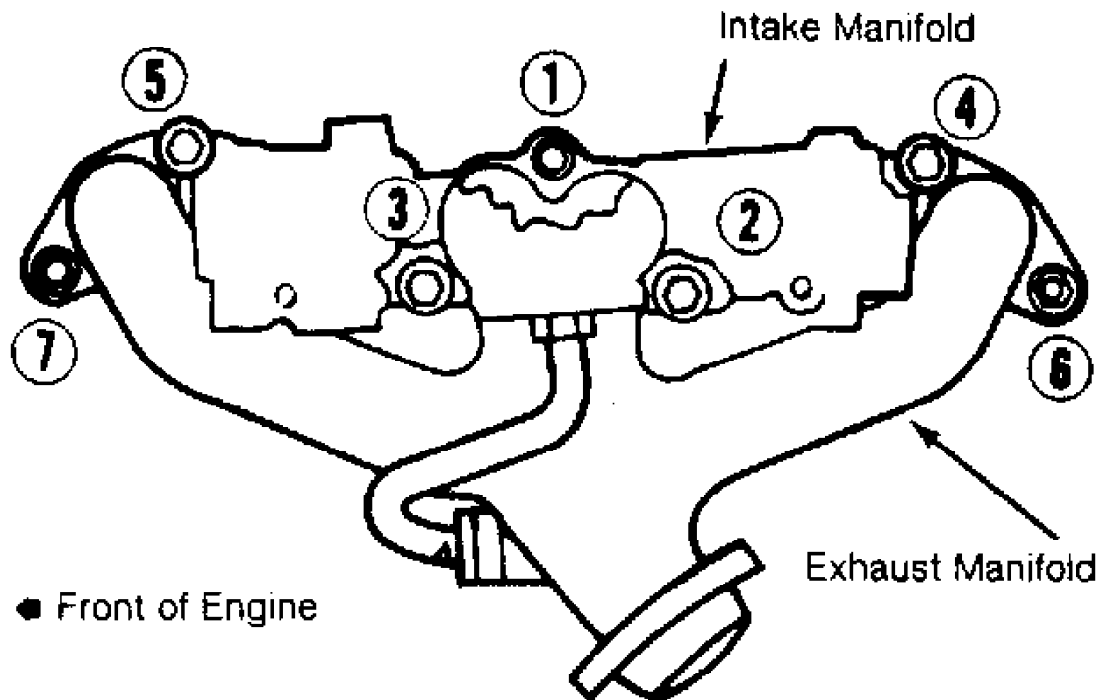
Intake & Exhaust Manifold Bolt Tightening Sequence
